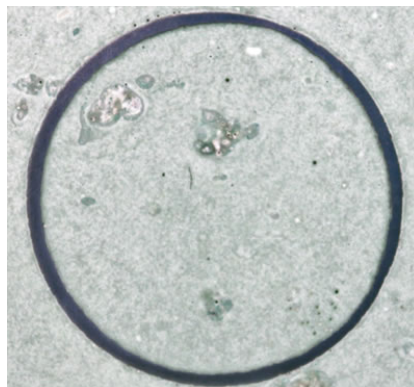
Transverse cross section thru pipe 2 inches upstream from leak
